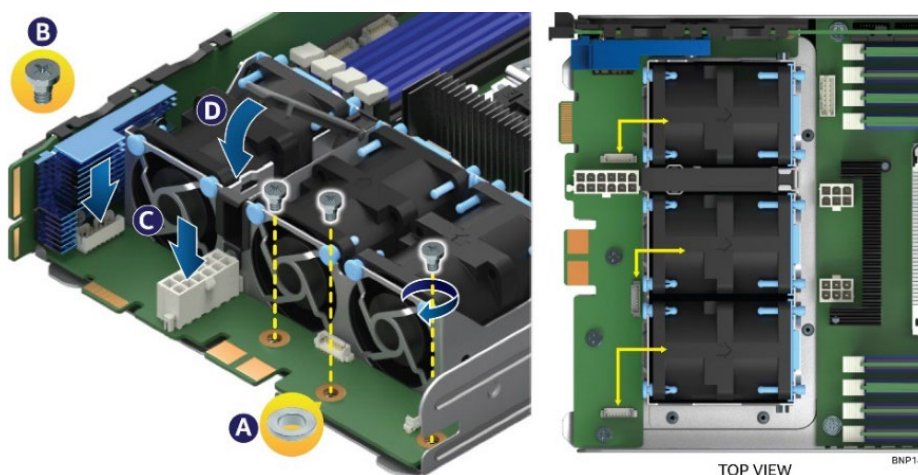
Installing the SAS/PCIe\* SFF Combo Power Docking Board
